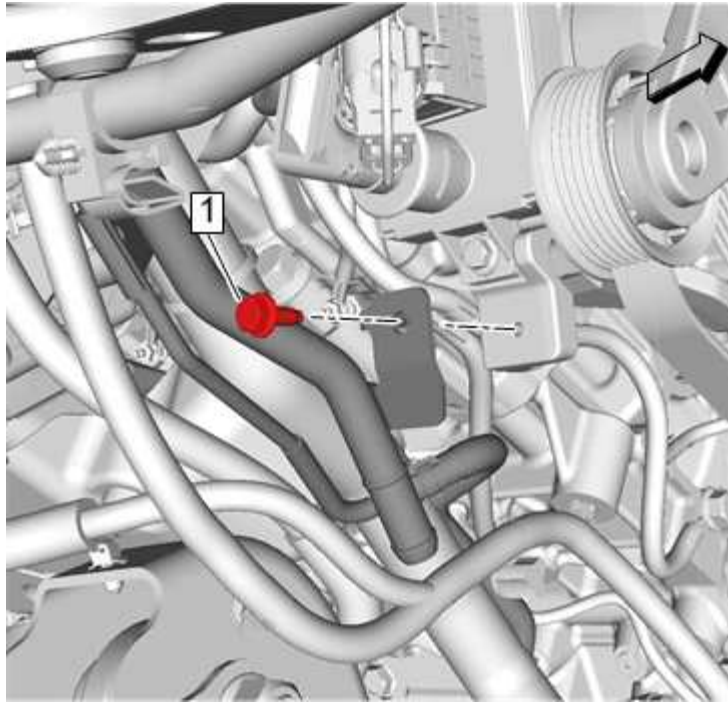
Heater Outlet Pipe Retainer Bolt And Generator Bracket
